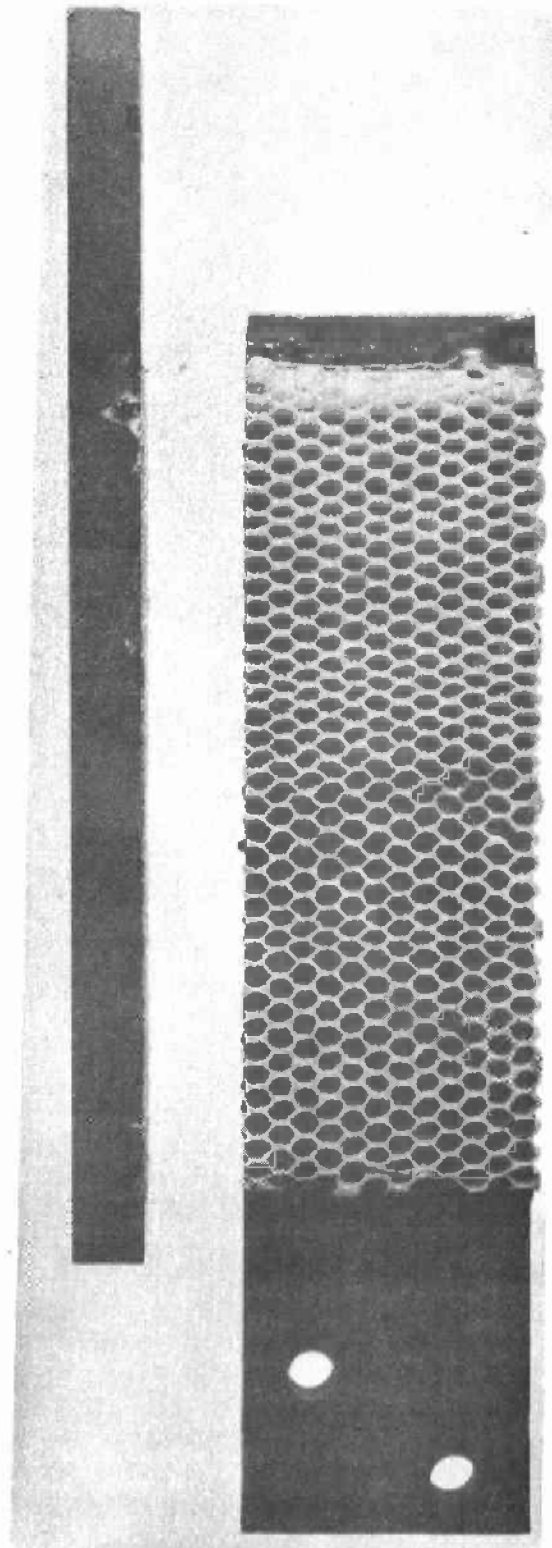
Typical sandwich specimen of fiberglass-honeycomb core and fiberglass-laminate facings after complete failure in shear fatigue test. Separation of core and facing took place after shear failure of core cell walls.
